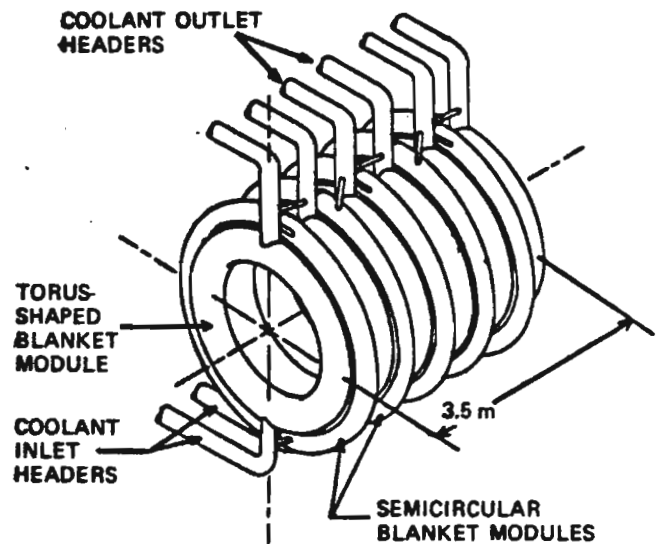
Perspective view of pressure vessel blanket in the central cell of SATYR.
